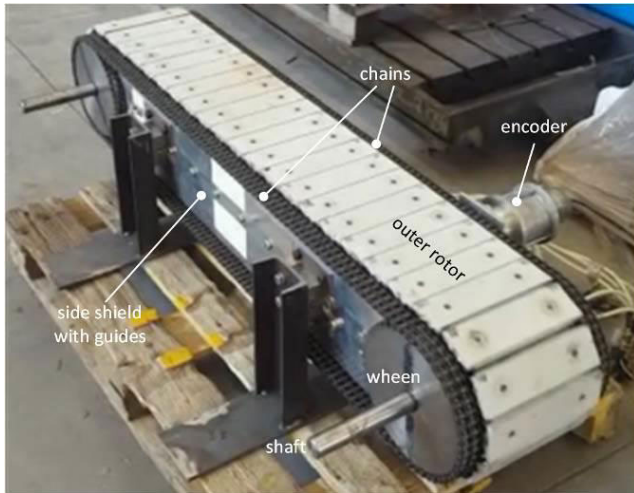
Assembled prototype equipped with the encoder for rotor position measurement and speed control.
